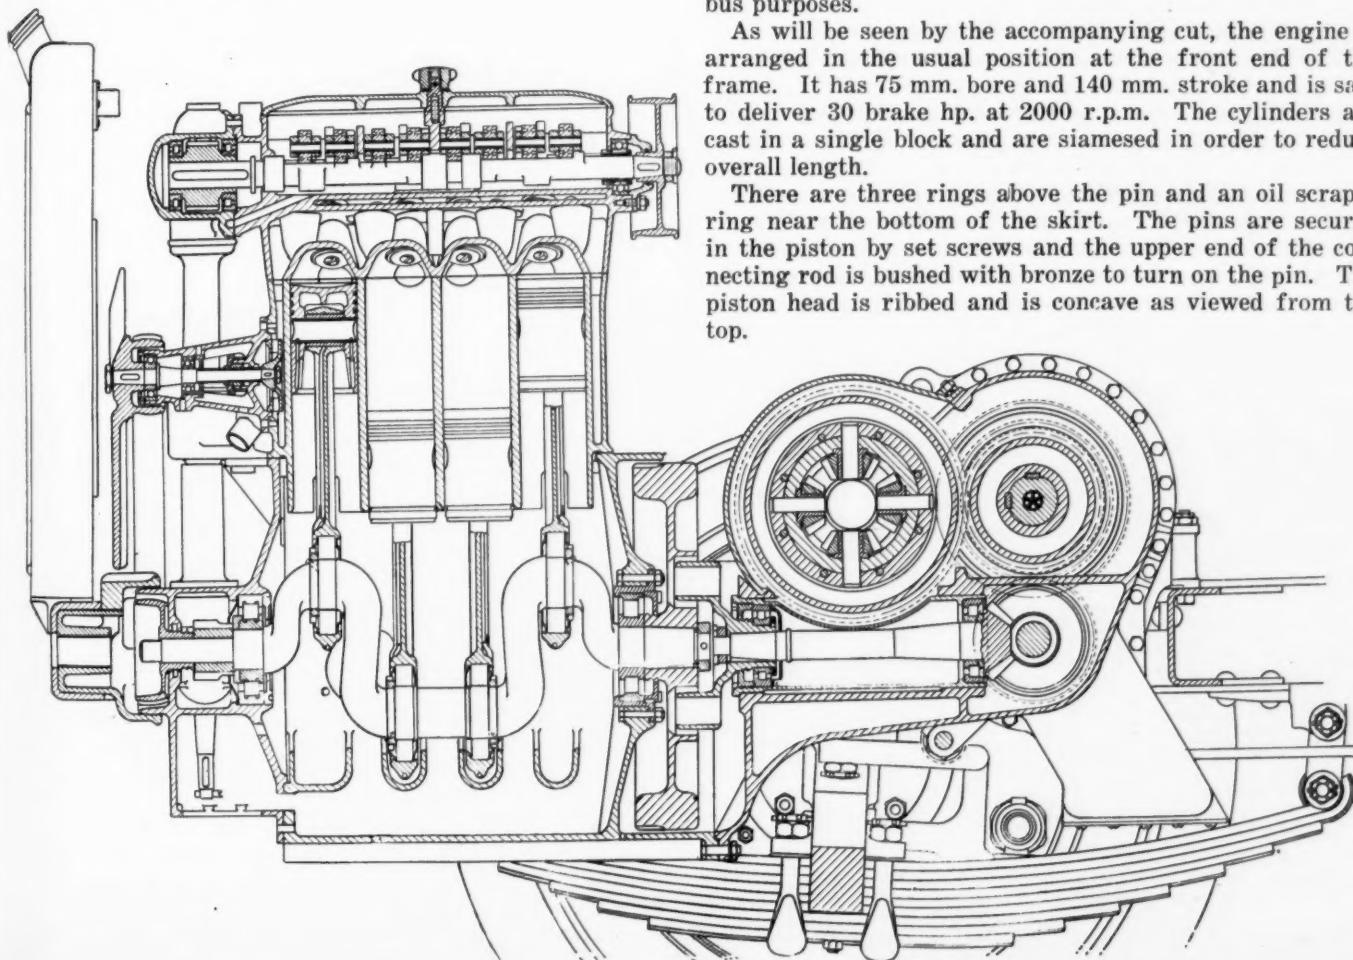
Vertical section of the Lippische engine showing the bevel gear drive to the gearset
